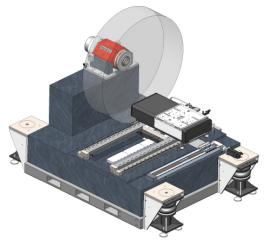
Stacked axis setup of 1500 mm ultra precision machine
